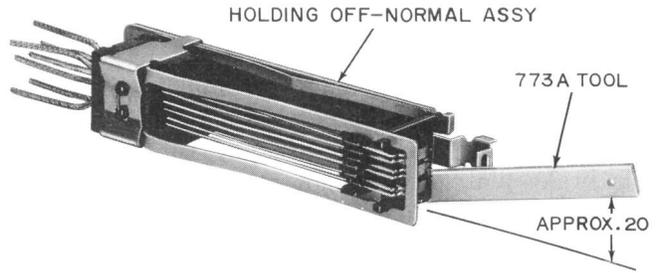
Method of Blocking Holding Off-Normal Assembly
